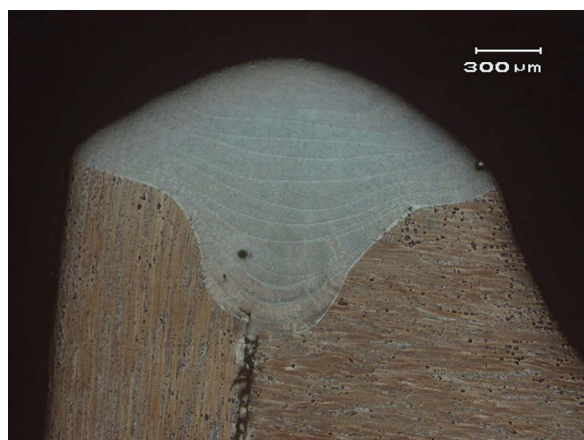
AA 3003 laser welded joint showing weld bead. Etched with 0.5 HF
